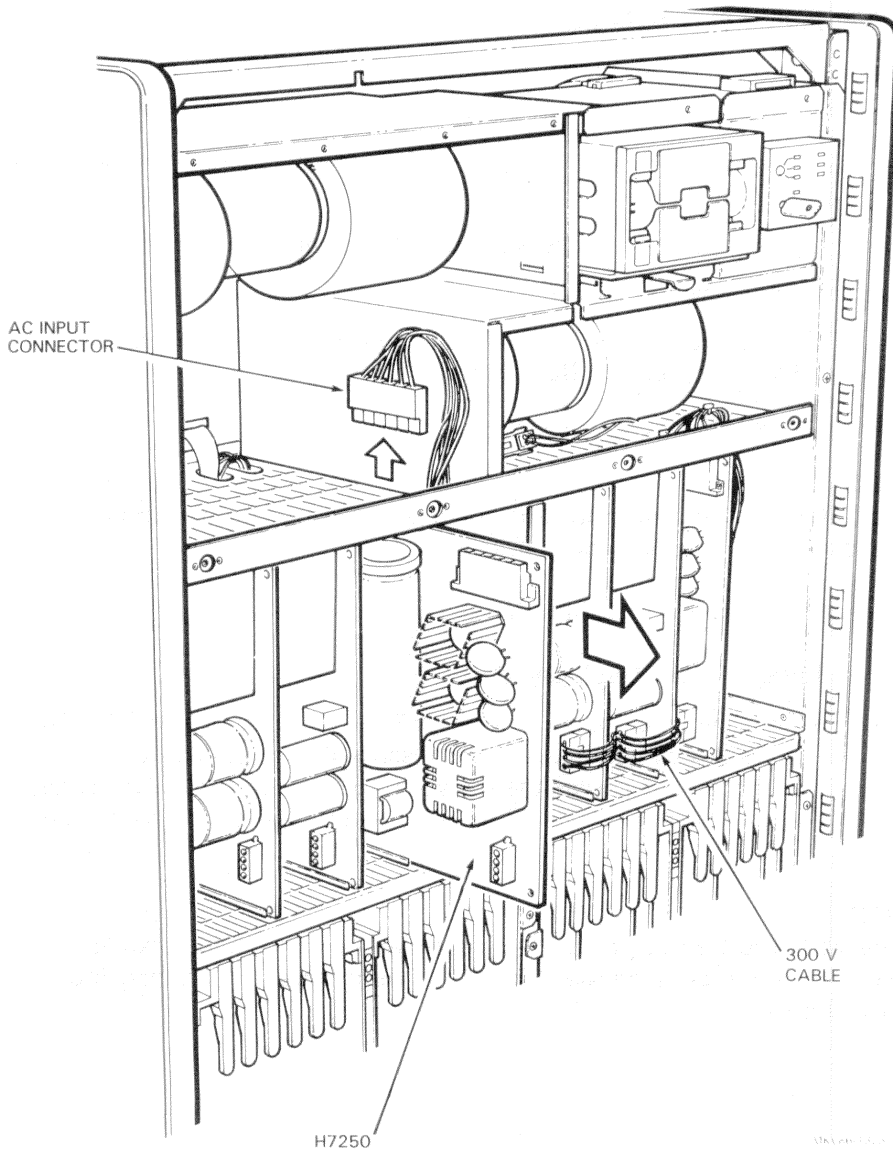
H7250, H7251, and H7253 Removal/Replacement
